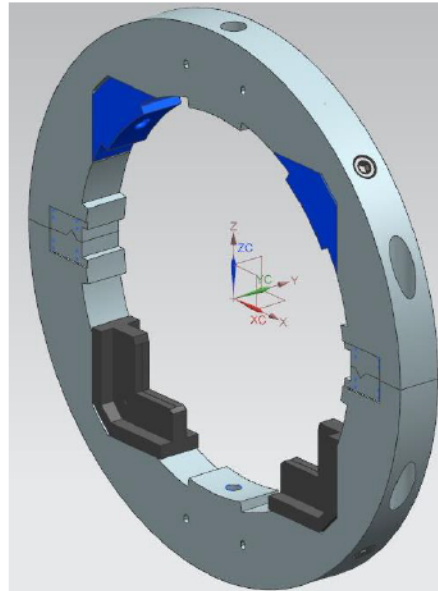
Rolling/Welding Clamp & Fixture, F10072149.
